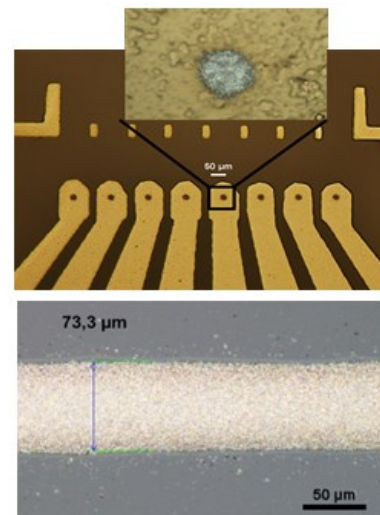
(top) laser printed indium solder bumps and (bottom) aerosol jet printed silver ink track.
